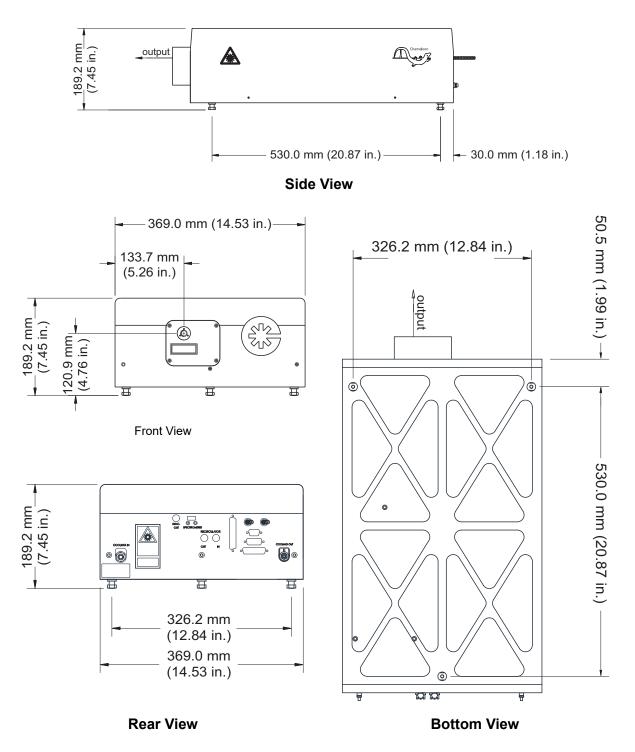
Chameleon Ultra Laser Component Dimensions (Continued)
